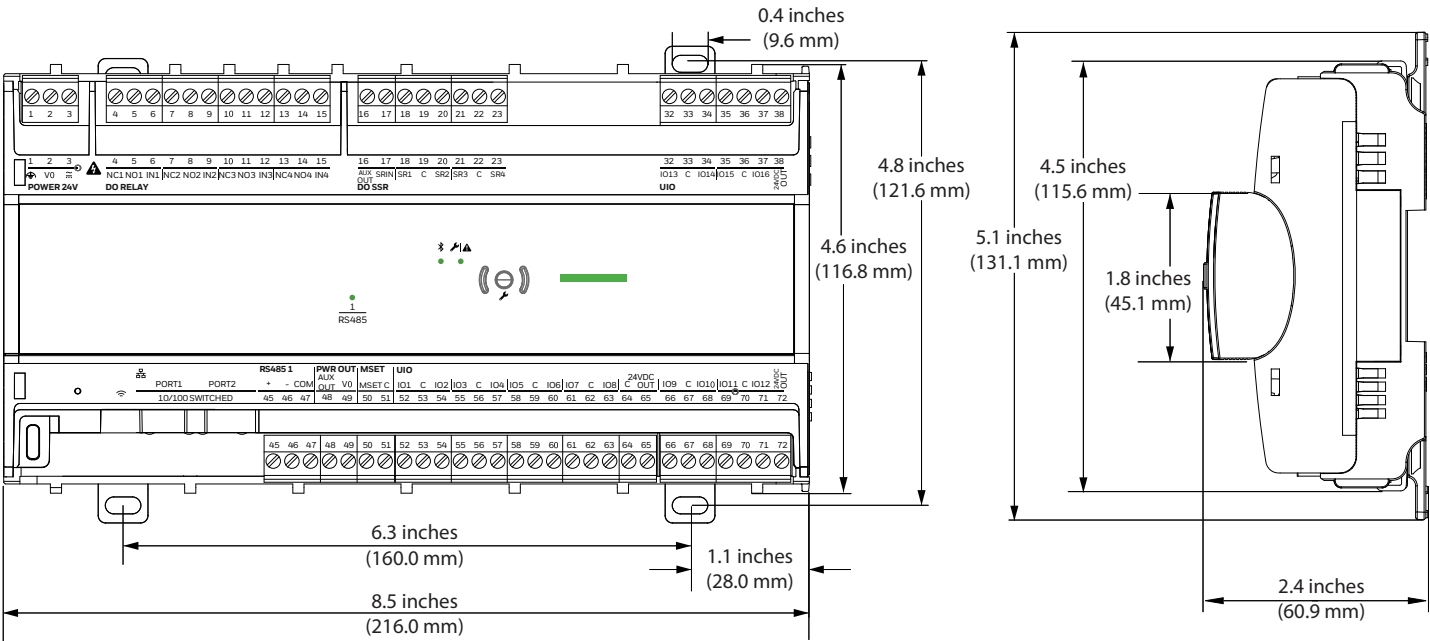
Alerton Unitary Controller (Large Housing) Dimensions
